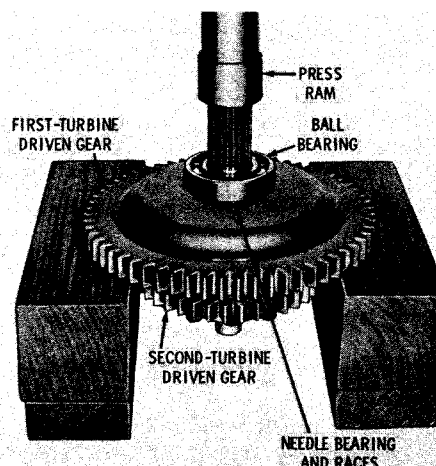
Pressing second-turbine driven gear from freewheel unit
